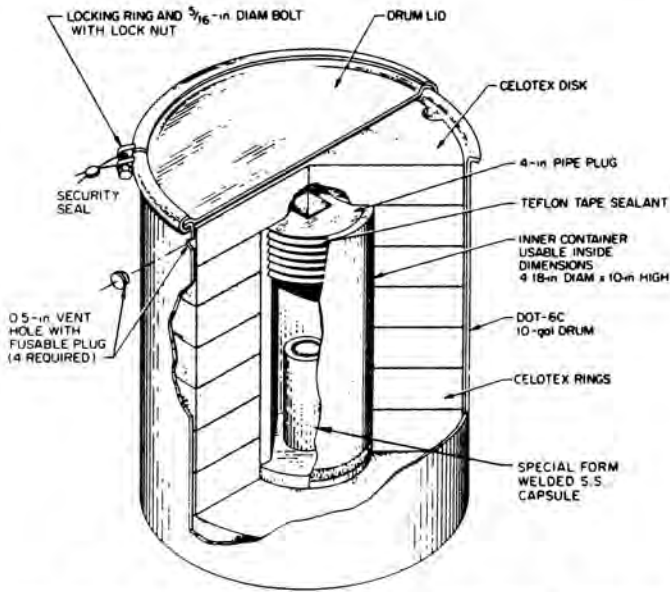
Typical assembly detail, ORNL DOT-6M - special form package.
